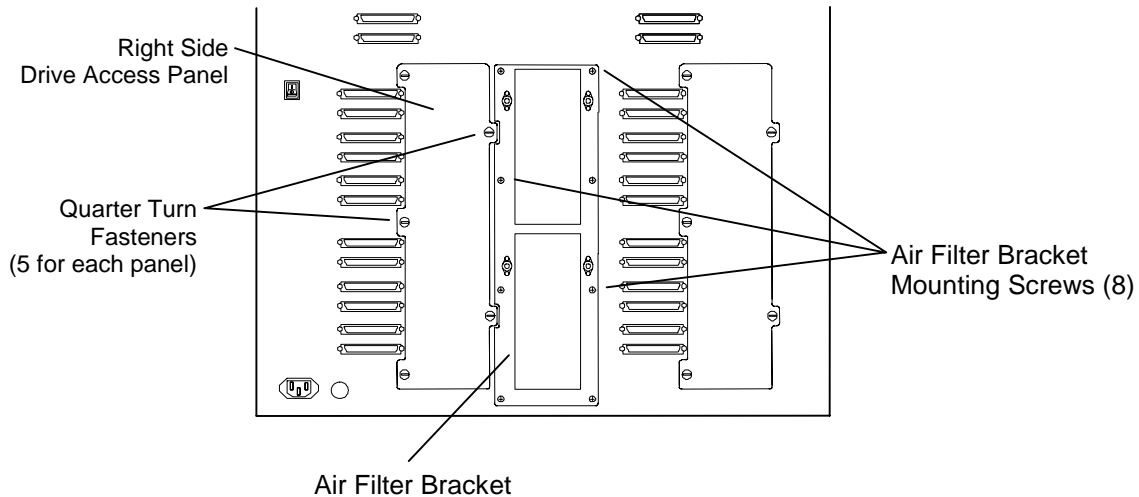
Air Filter Bracket on Rear of TLS-412300/600
